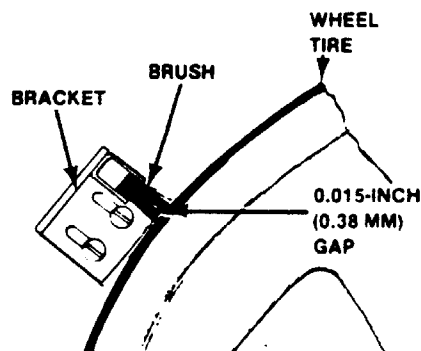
WHEEL BRUSH POSITION ON LOWER WHEEL.
